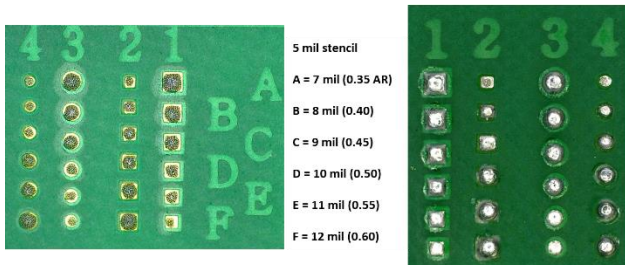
Graping Reflow Patterns. Printed Solder Paste (Left) and Reflowed Solder (Right)
